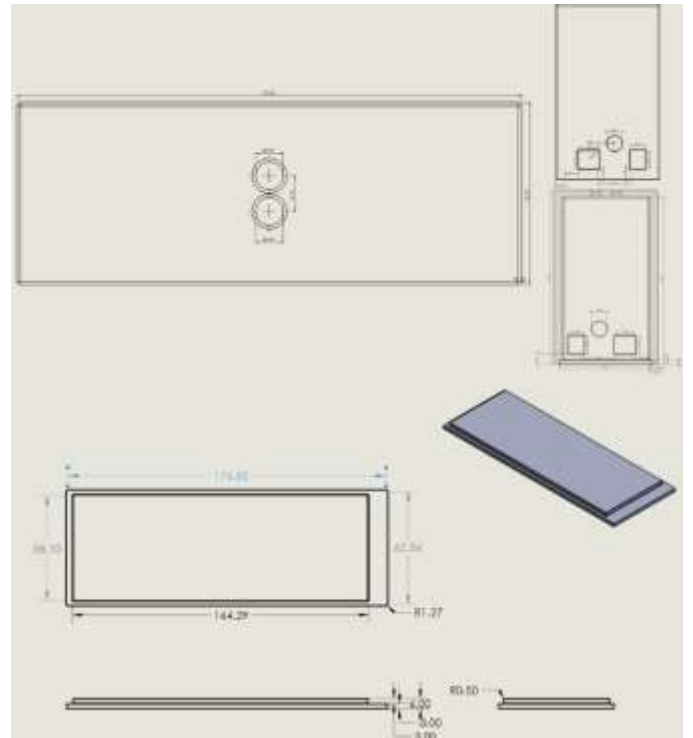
CAD Models and Dimensions of the Electronics Housing (Top) and Base (Bottom)
